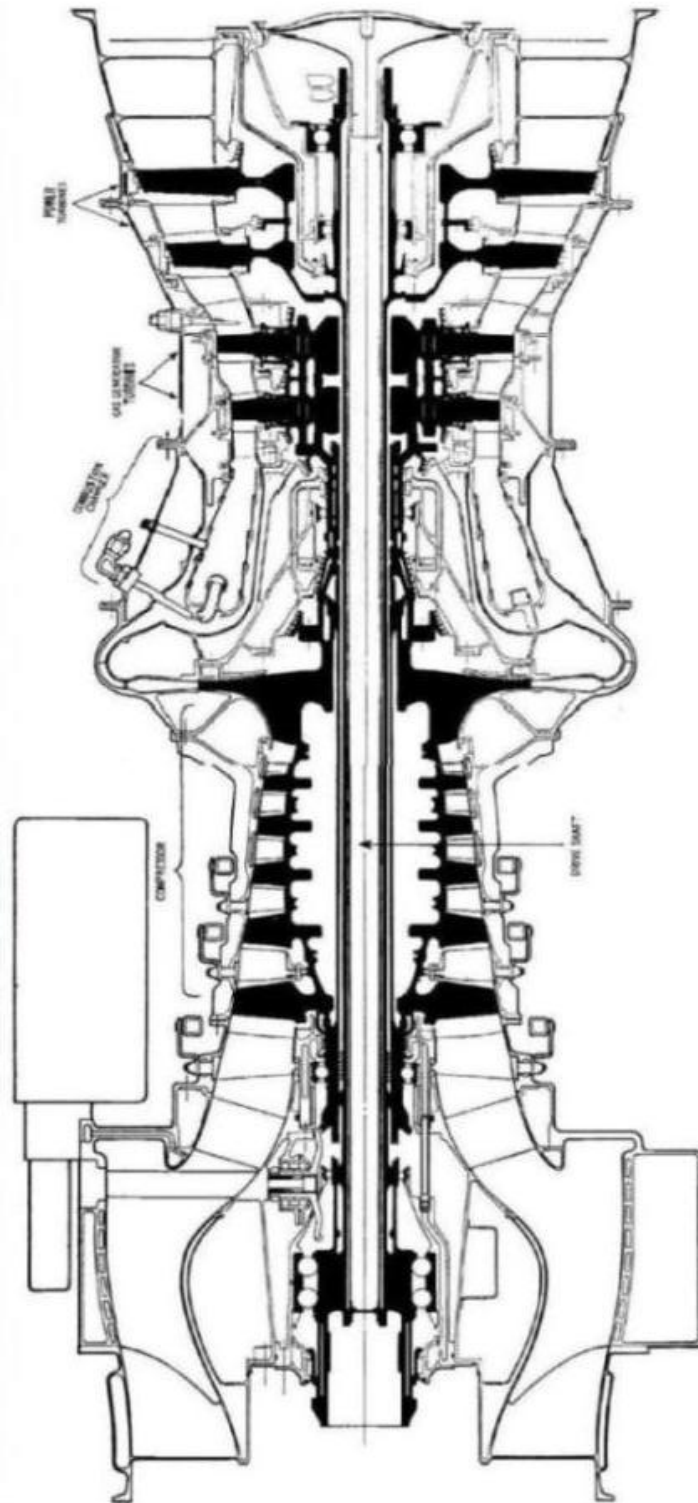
Cut-section View of T700 Rotorcraft Engine.
